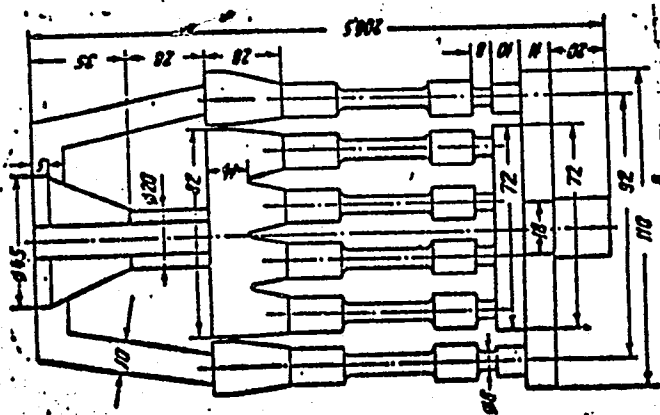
Recommended molds for casting small samples for tensile or impact ductility tests
